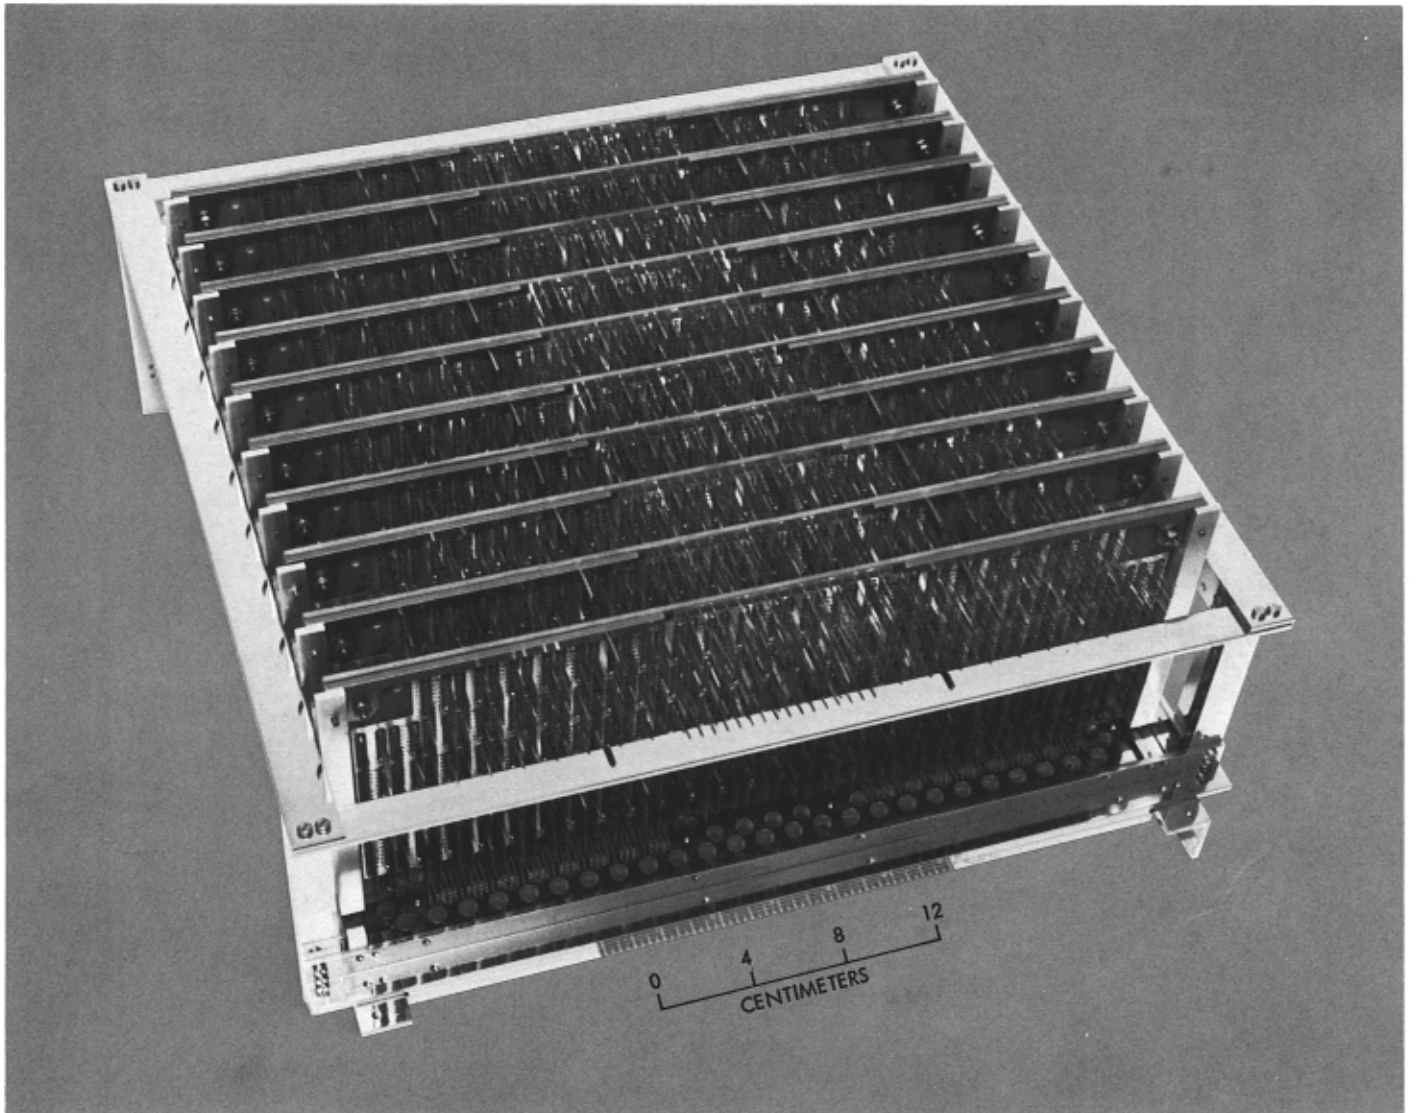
Total Integrated DIP Microcircuit Card and Cage Packaging Assembly
